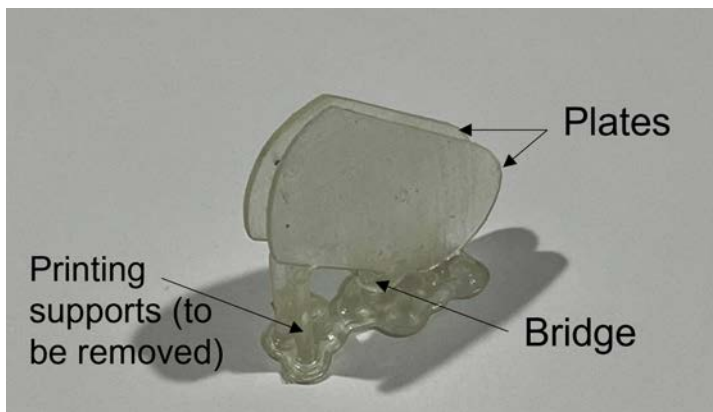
A prototype splint for the MT was made on a 3D printer. The splint is fixed on the supports necessary for the printing process (later removed).
